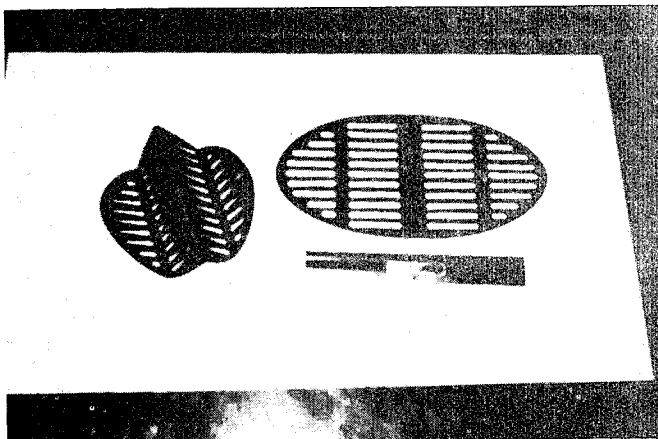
15" diameter die cut and framed support for scrubbing tower packing.
